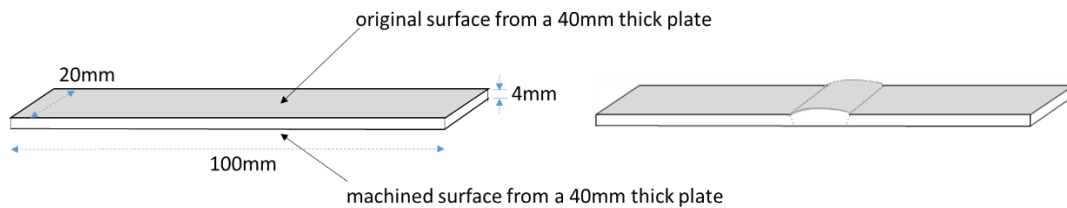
Four-point bend specimens (parent specimen and as-welded specimen)
